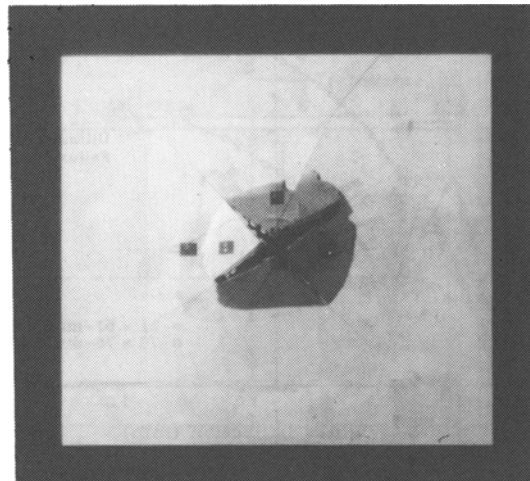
Bottom of specimen 8 with dye penetrant after primary failure
